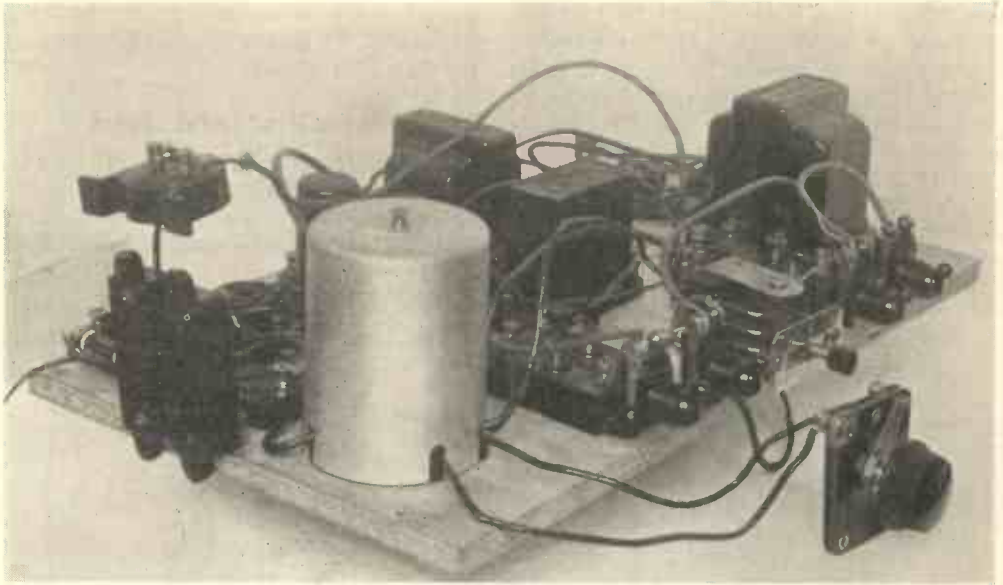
THE BASEBOARD WIRED UP READY FOR INSERTING IN CABINET.
